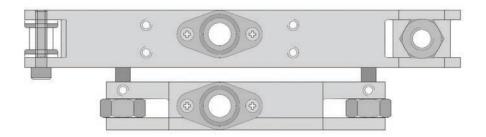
End view of machining fixture showing clamped collar and removable depthsetting washer (red). In this example, the depth-setting washer was 2 mm thick.
